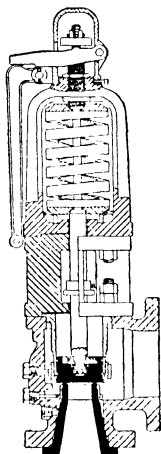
Nozzle type super heater safety valve. (*Crosby Steam Gage and Valve Company.*)
